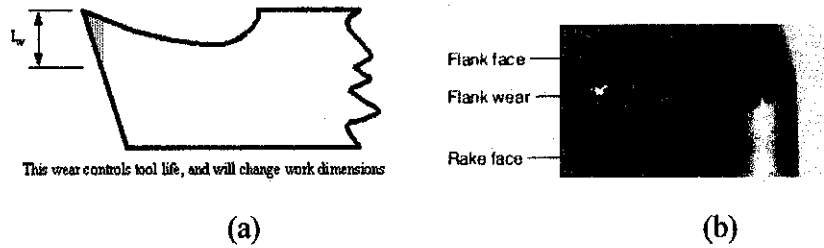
Flank wear; (a)the point tool degrade (b) 3D image tool flank wear [19]
